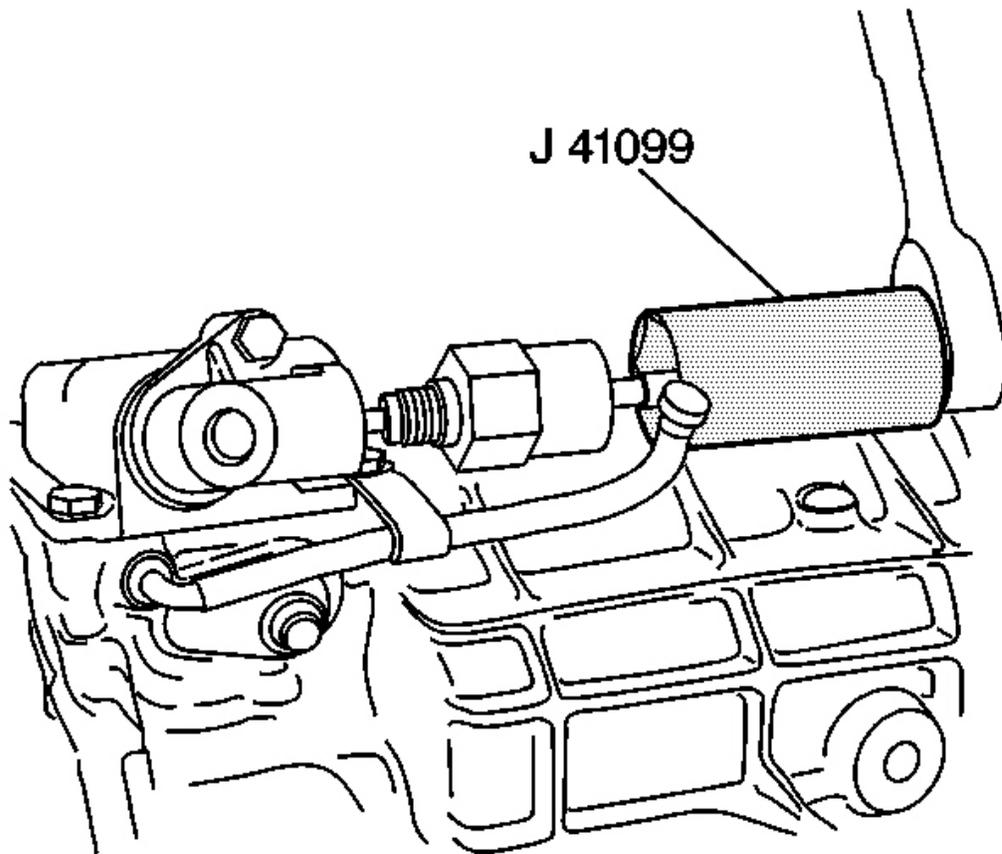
Using J 41099 To Remove/Install Reverse Lockout Solenoid To Reverse Lockout Body Assembly
